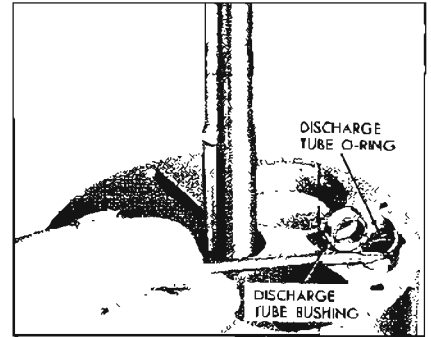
Installing Discharge Tube O-Ring and Bushing
